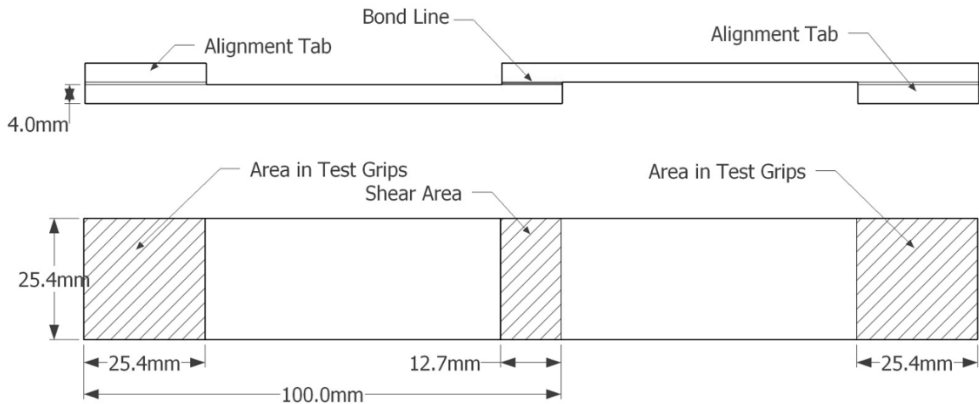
Schematic of standardised wood lap shear test specimen. Side and top view of test specimen composed of two adherends adhesively bonded together in the centre (bondline).
